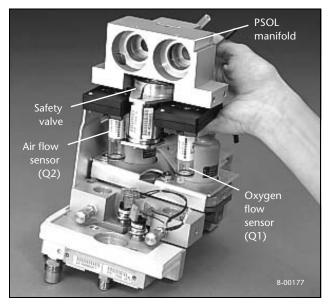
Replacing oxygen and air flow sensors (Q1 and Q2) and safety valve
